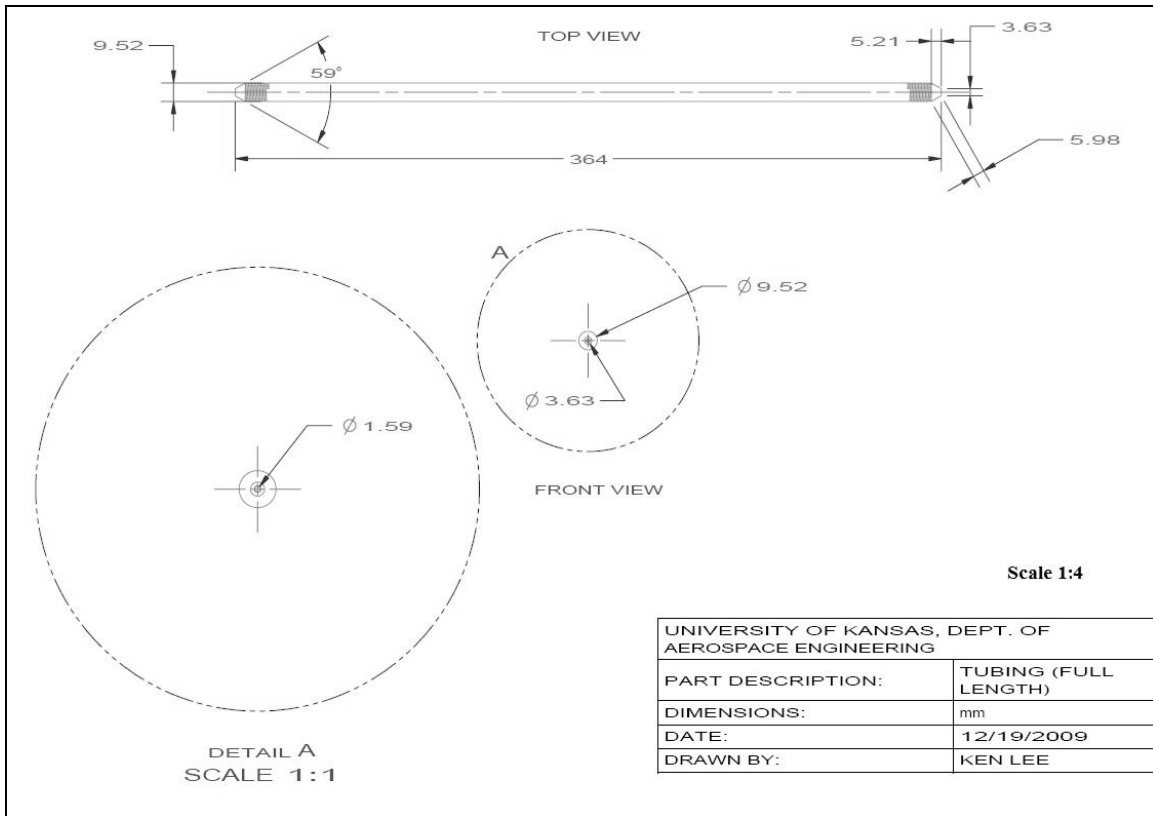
Top and Front CAD Views of the Full-Length Tubing Drafted in UG NX 6.0.
